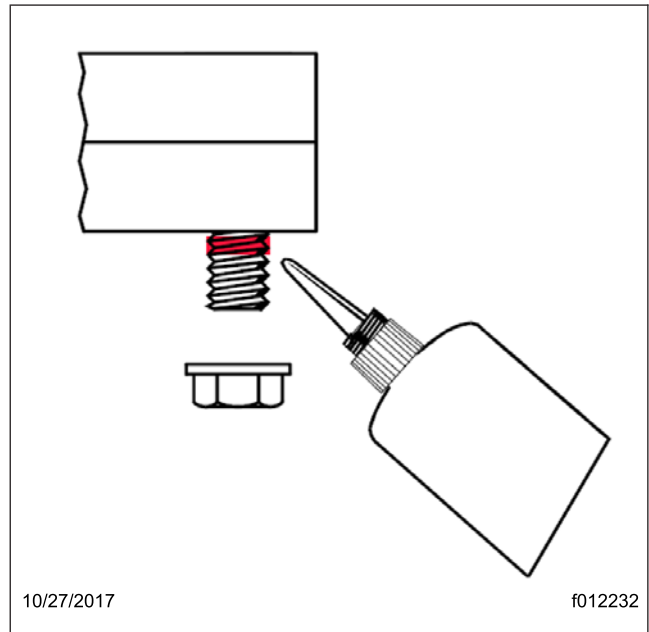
, Applying Thread Locker on the 1/4-20 Studs
